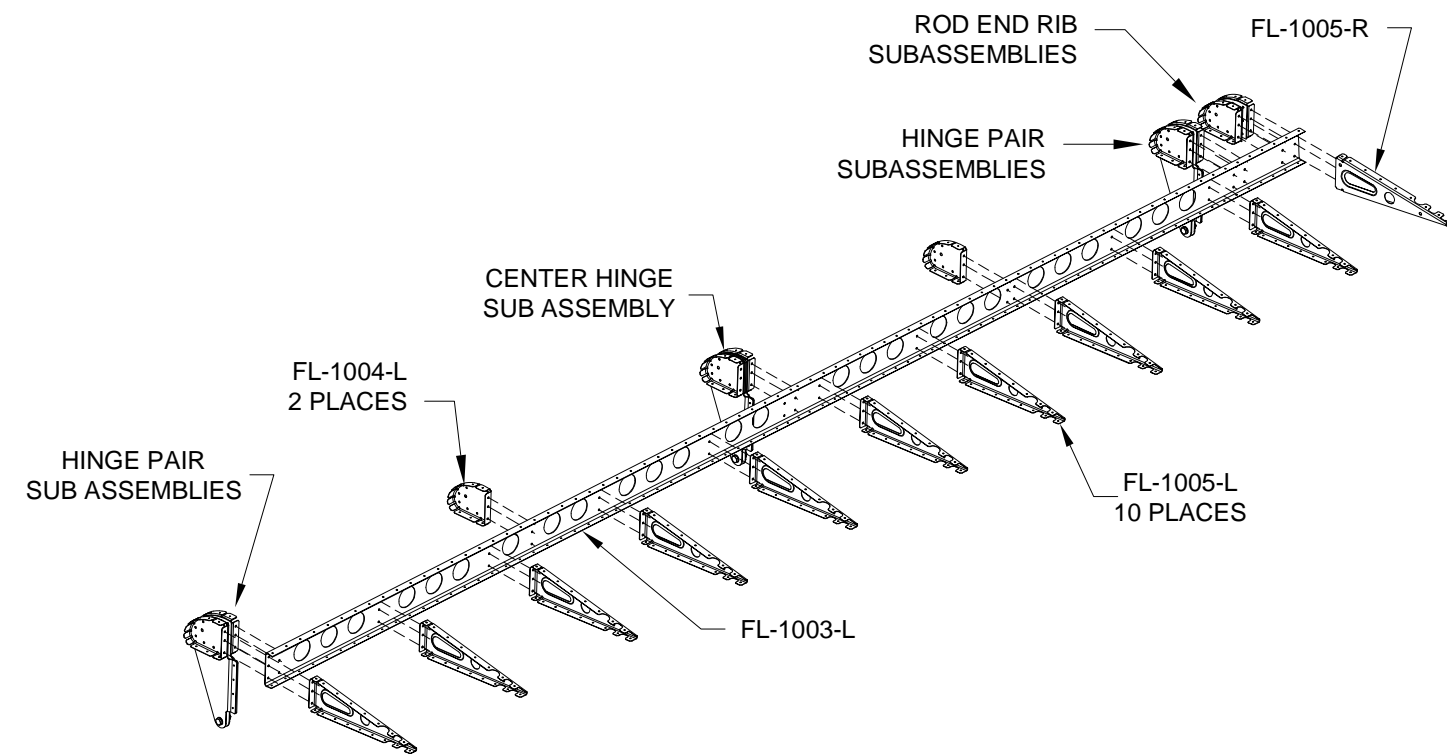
RIVETING RIBS AND SUB ASSEMBLIES
